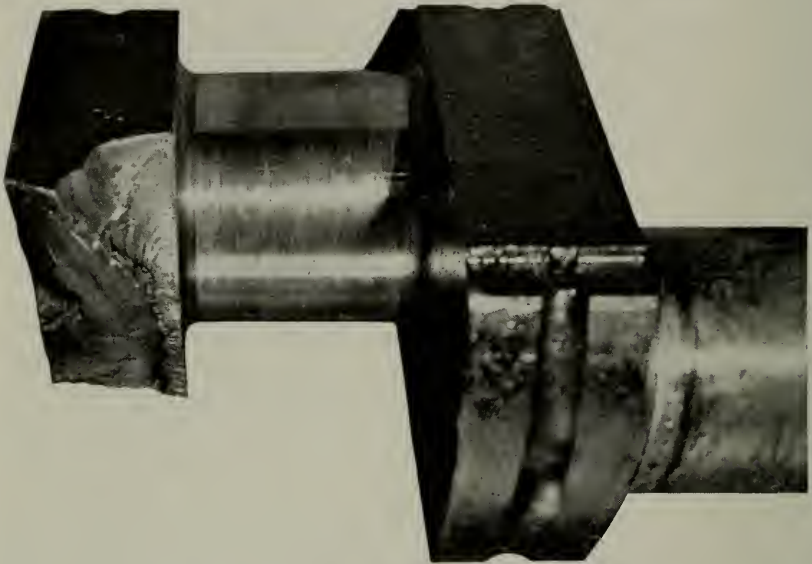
Crank distortion caused by bearing misalignment resulted in the breaking of this crankshaft. The fatigue cracks started in the fillet on the journal side of the crankweb.
